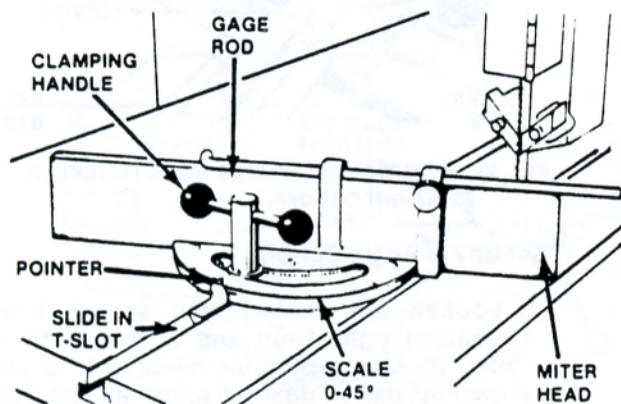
PROTRACTOR WORKSTOP & ALIGNING GAGE SET-UP.
